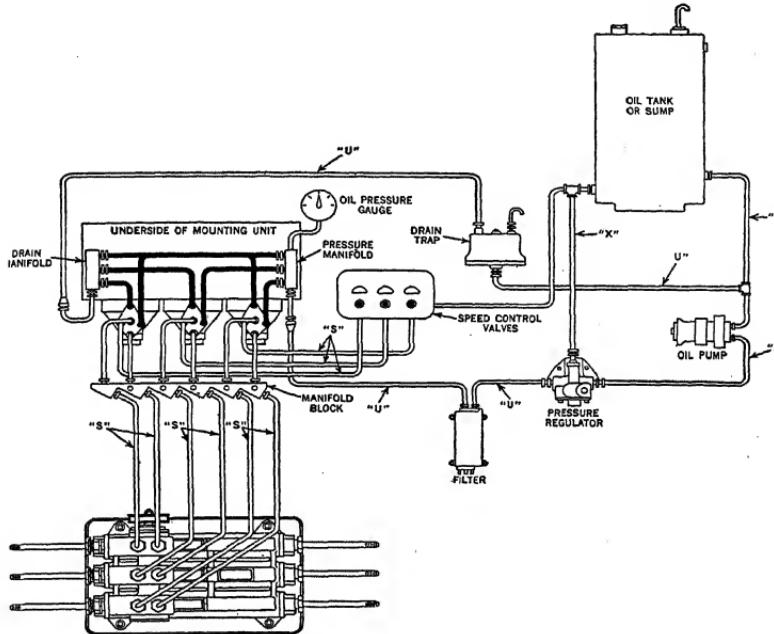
Hydraulic system with single oil pump and drain trap.
